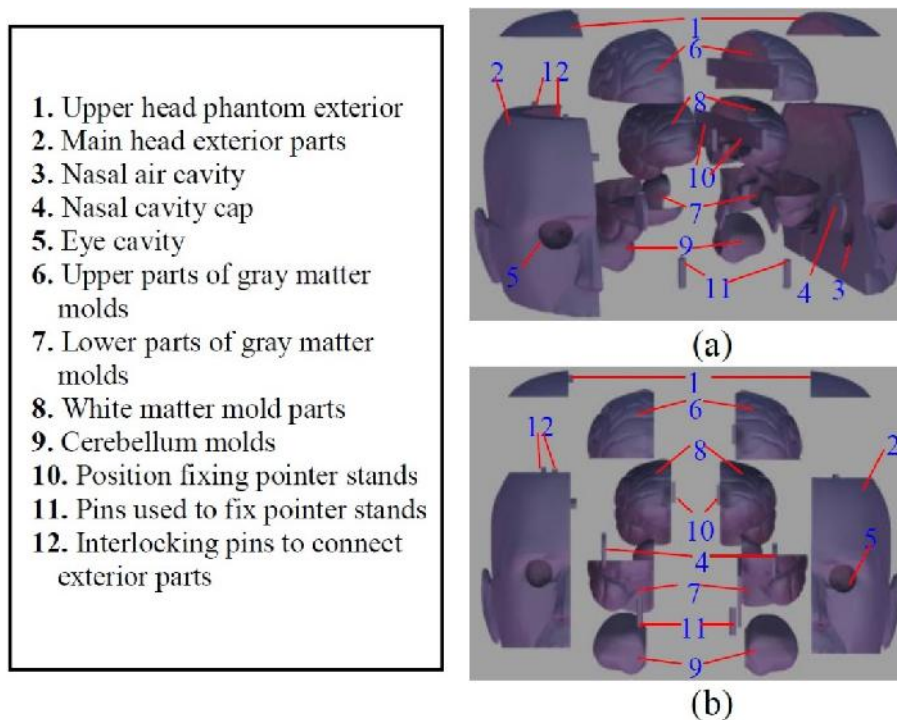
Exploded view of the phantom parts modelled for the 3D printer from (a) perspective angle and (b) front side.
